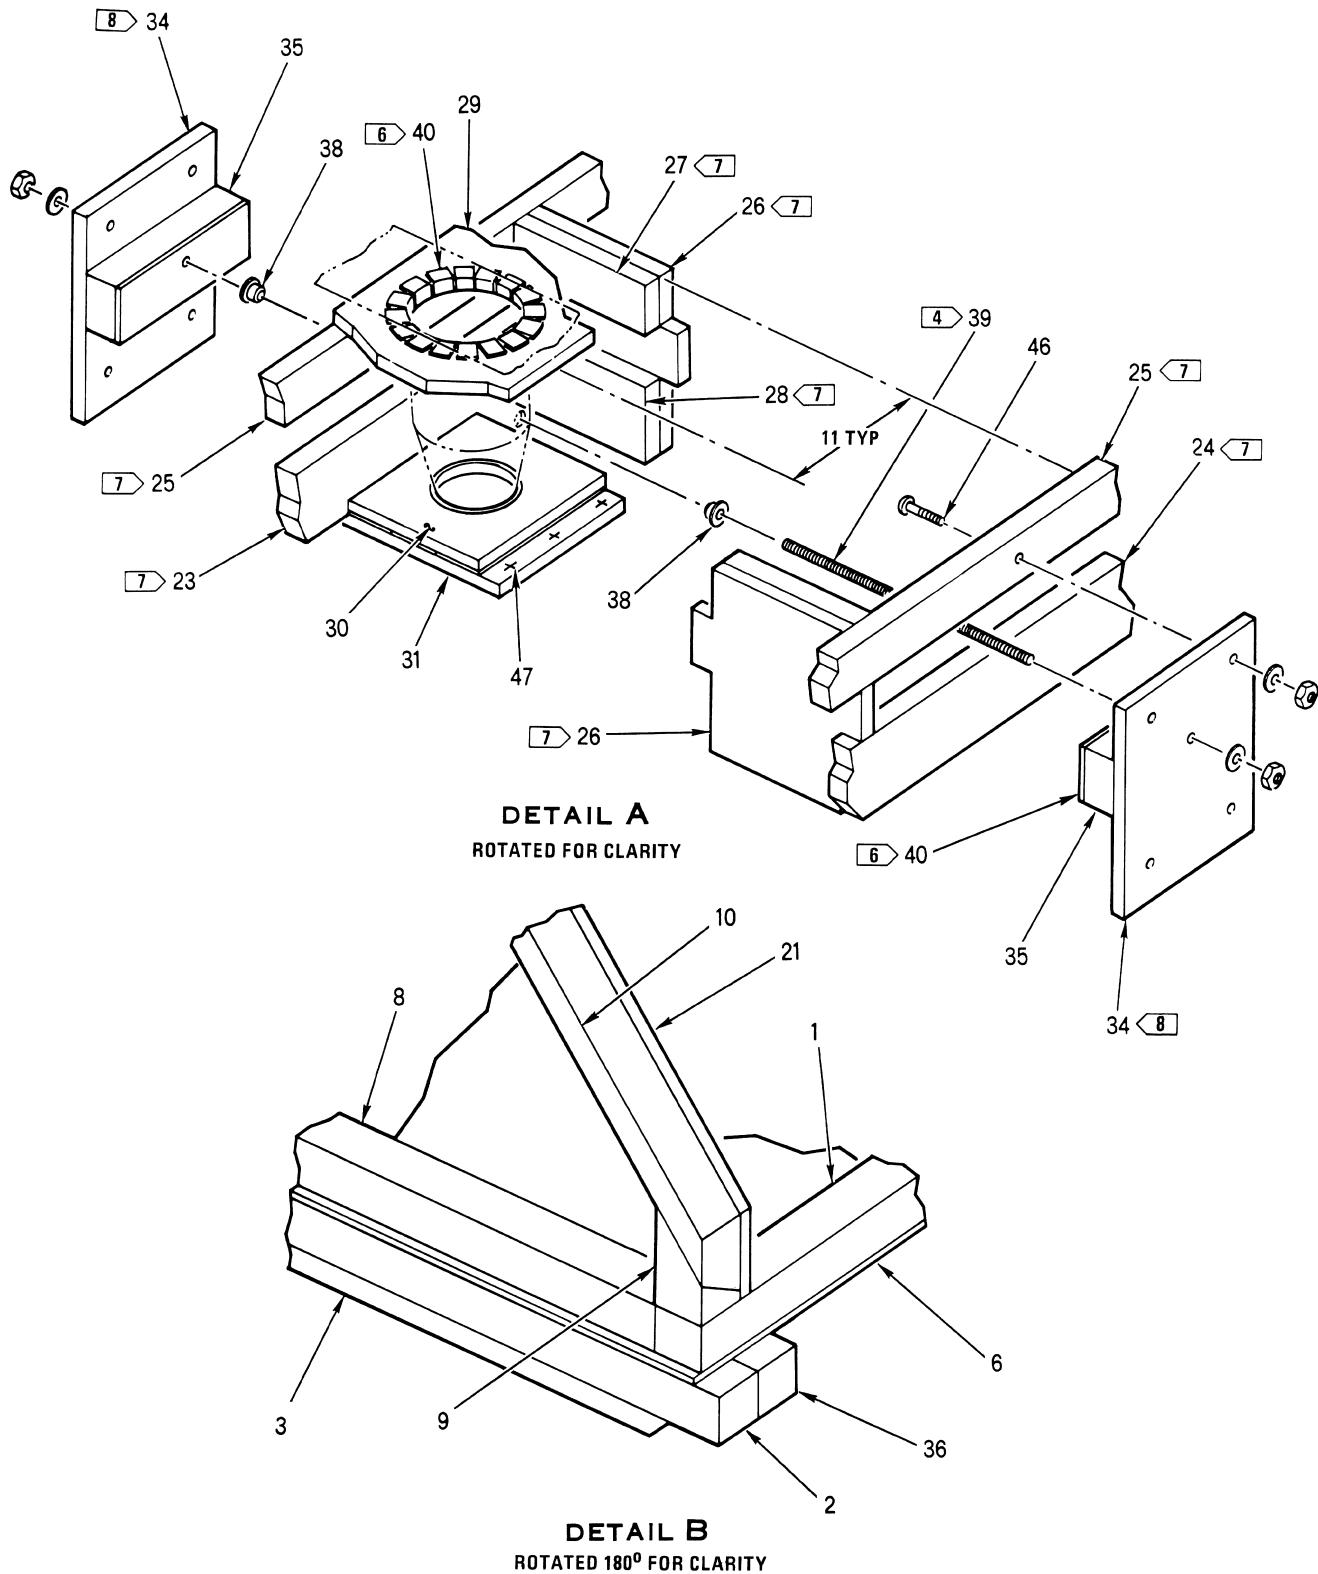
Main Landing Gear Aft Door Shipping Container (Sheet 2)
